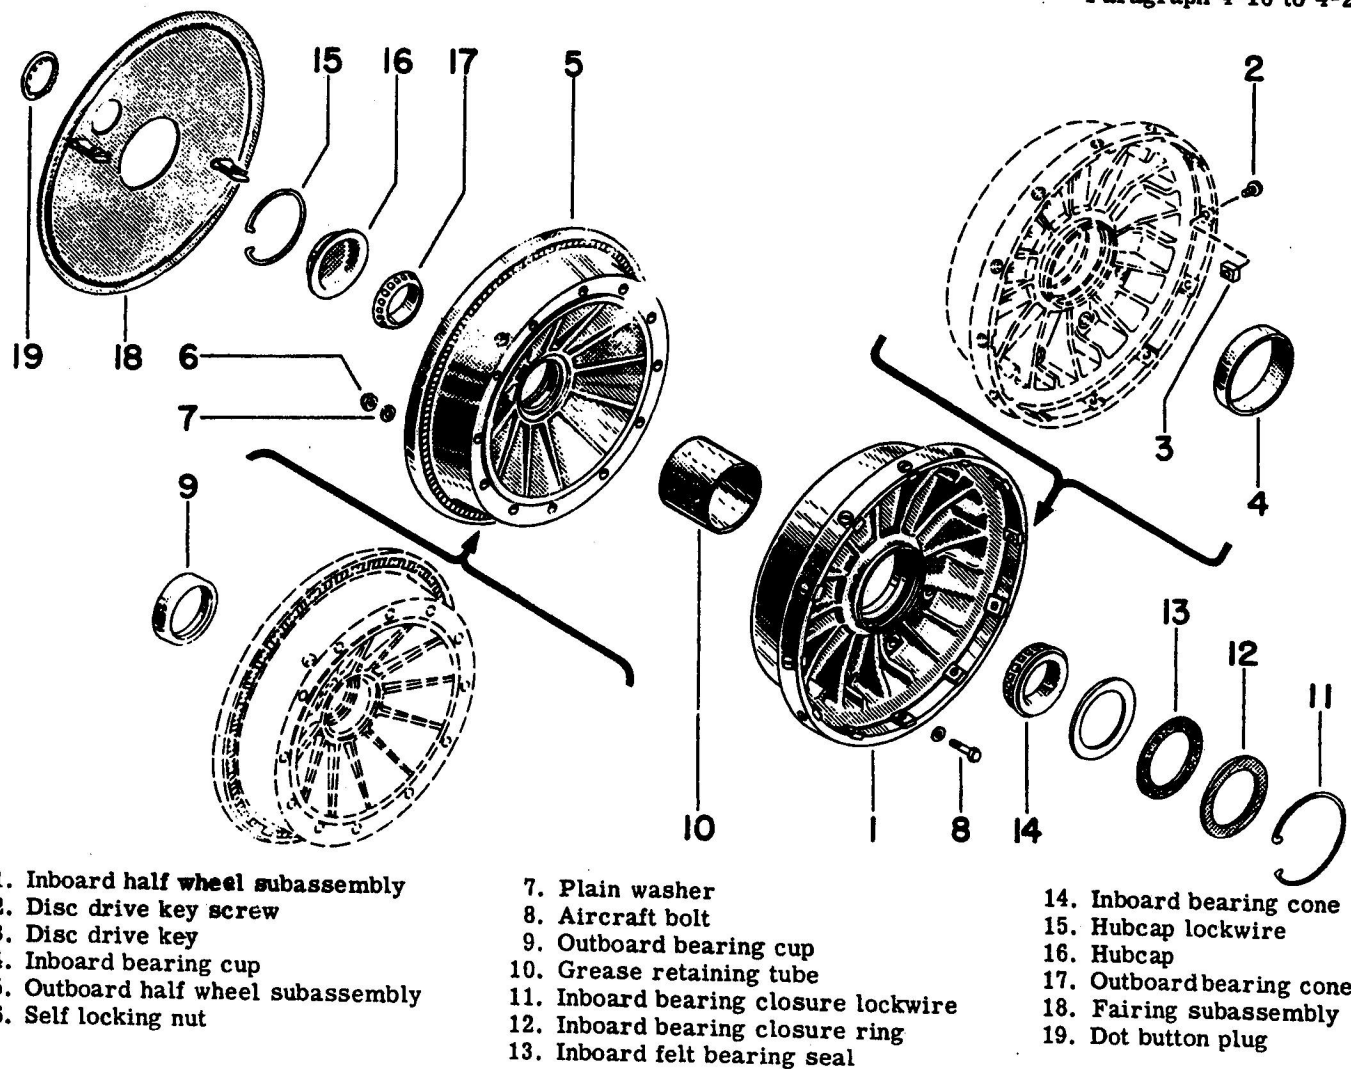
Landing Wheel for use with Single Disc Brake, Divided Type - Exploded View
